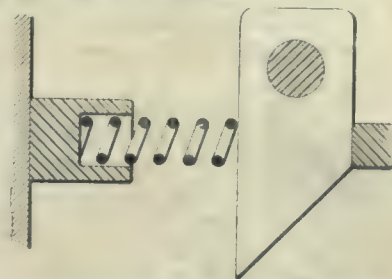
DOG FOR RECIPROCATING MACHINE PART
